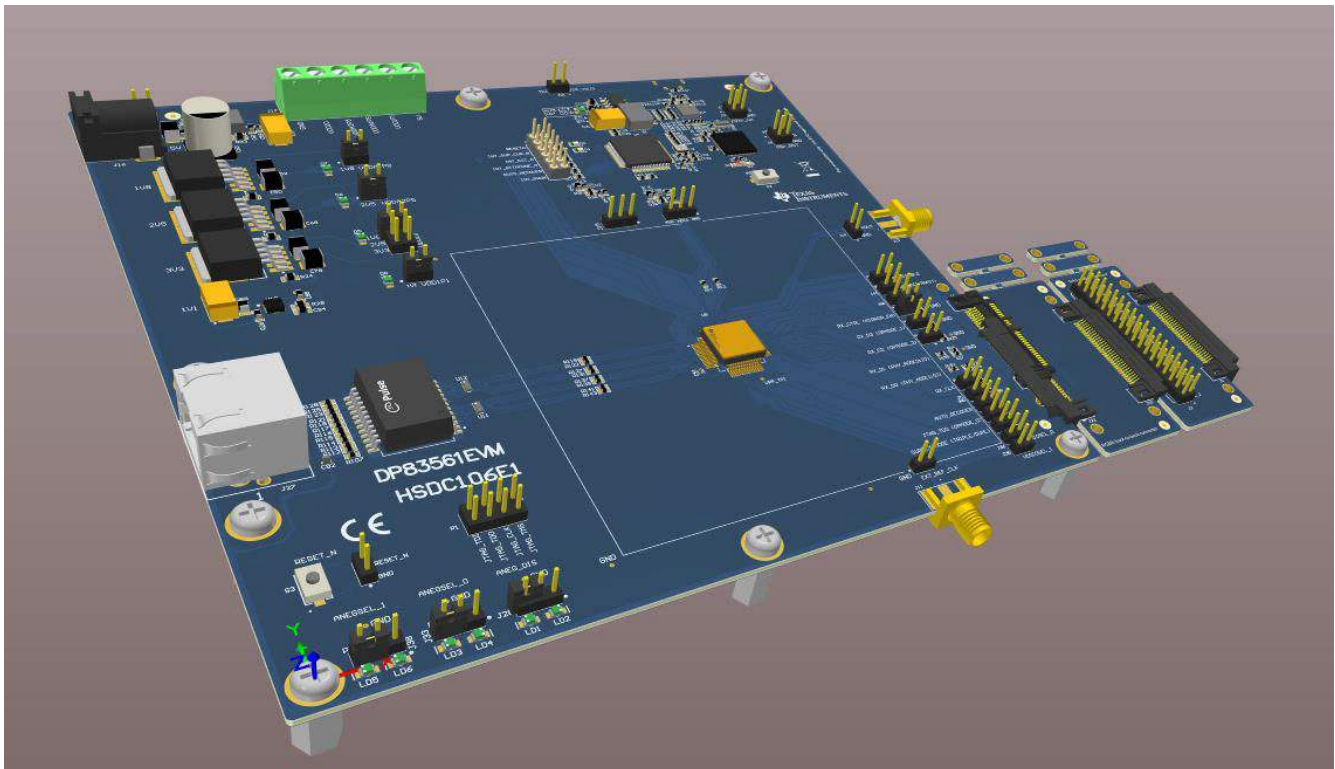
DP83561EVM Main PCB and Two Breakout Boards
